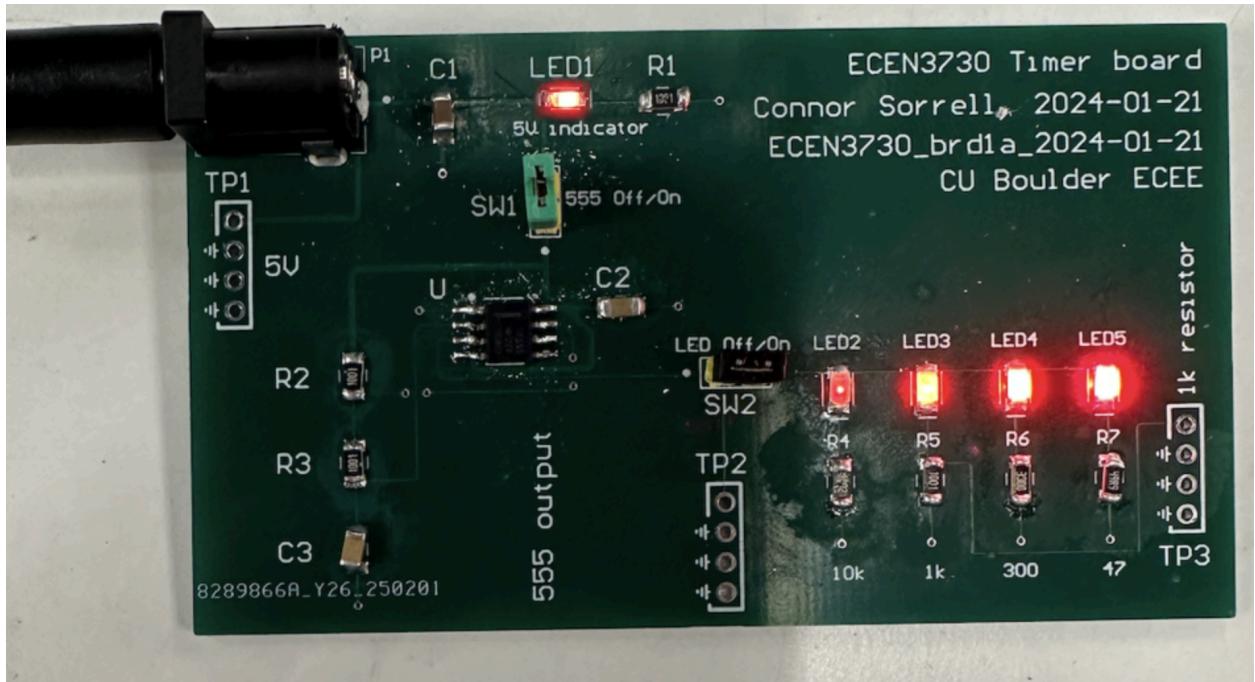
Picture of assembled board with lights on plugged into 5V power adapter
